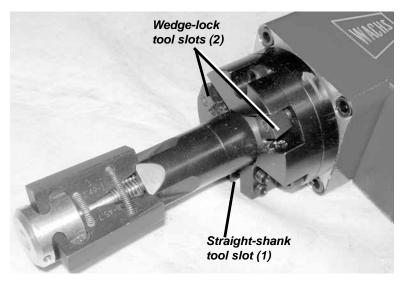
The photo shows the tool mounting slots on the standard tool head.
